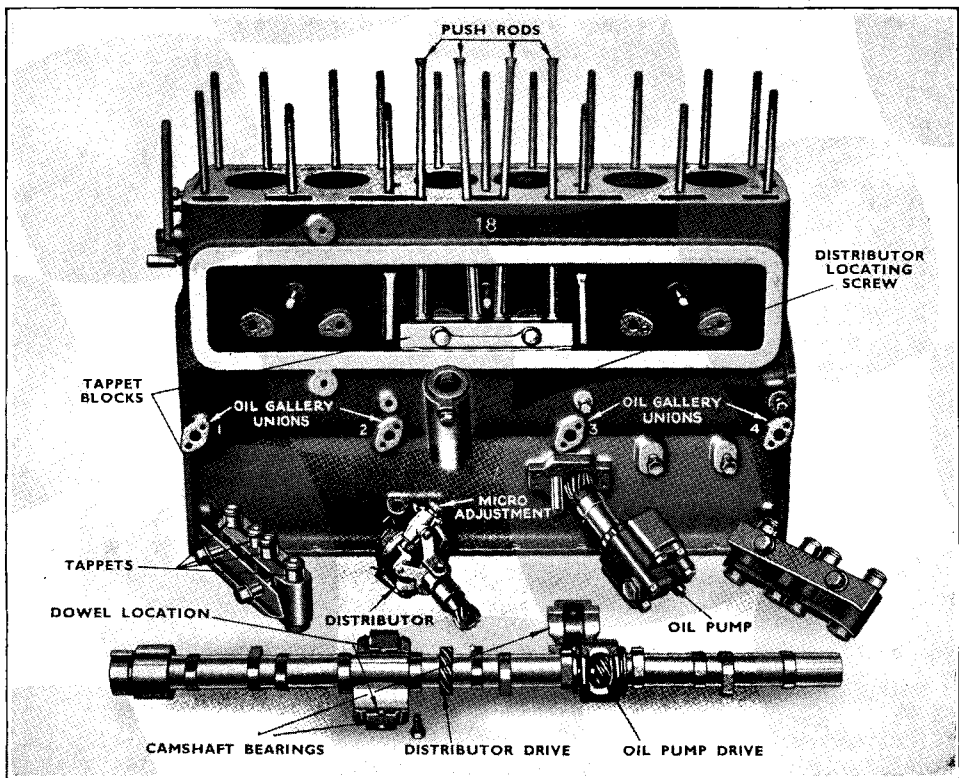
Illustration No. 27.—With details of the camshaft and operating gear for the overhead valves.
